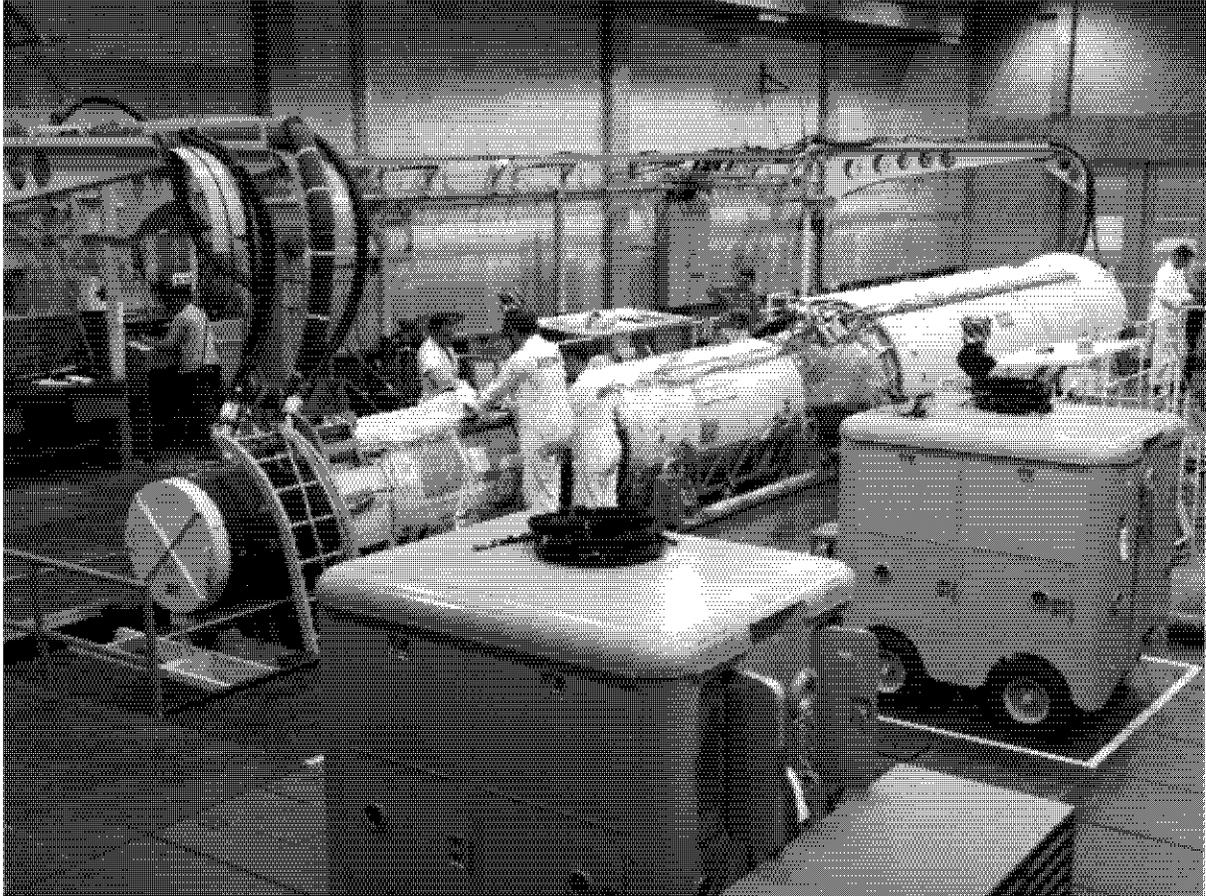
Boeing technicians perform missile assembly and checkout tasks in a Missile Assembly Building at CCAFS, 1 February 1963 (NARA).
